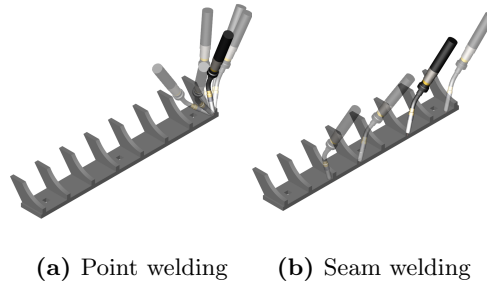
Sample poses and task nullspaces for (a) point welding and (b) seam welding.
